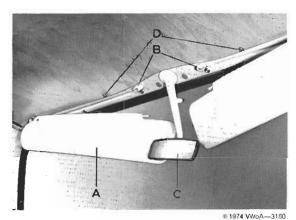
Sun visors A, retainers B, rear view mirror C, and Phillips head screws D.
